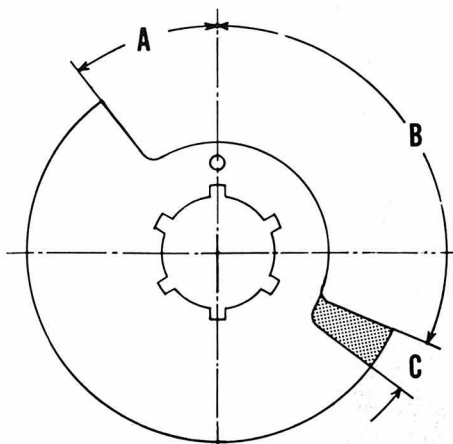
Drawing of rotary valve showing shaded area to be removed from opening end. Angle (A) is 35 degrees, angle (B) is 115 degrees and angle (C) to be removed is 11.5 degrees.
